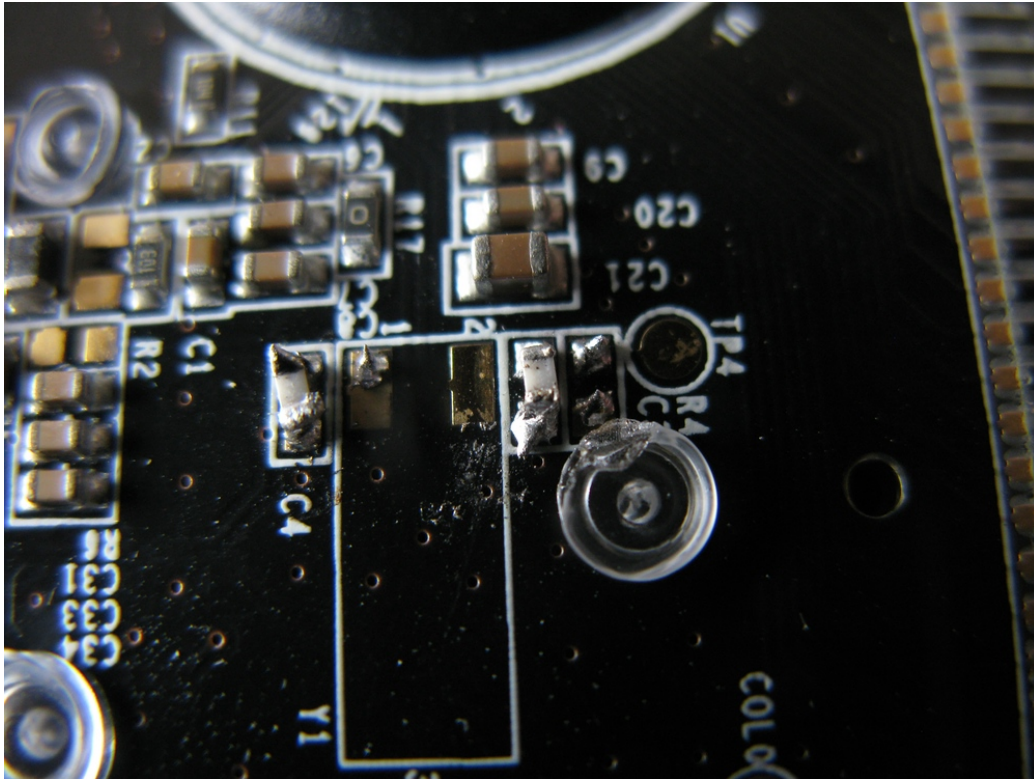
Put tiny capacitors in the vicinity of C3 and C4, hold with wooden toothpick, solder contacts, while solder is liquid, put the caps in position with toothpick. This is a layman's work. If you can do better - good for you! On the HP 20b, all the soldering contacts have a bit of solder on it, which is even easier. Having converted four machines in the meantime, I found that it is best to only put a tiny amount of solder on one of the contacts, solder the cap to it and only then add solder to the other contact.
